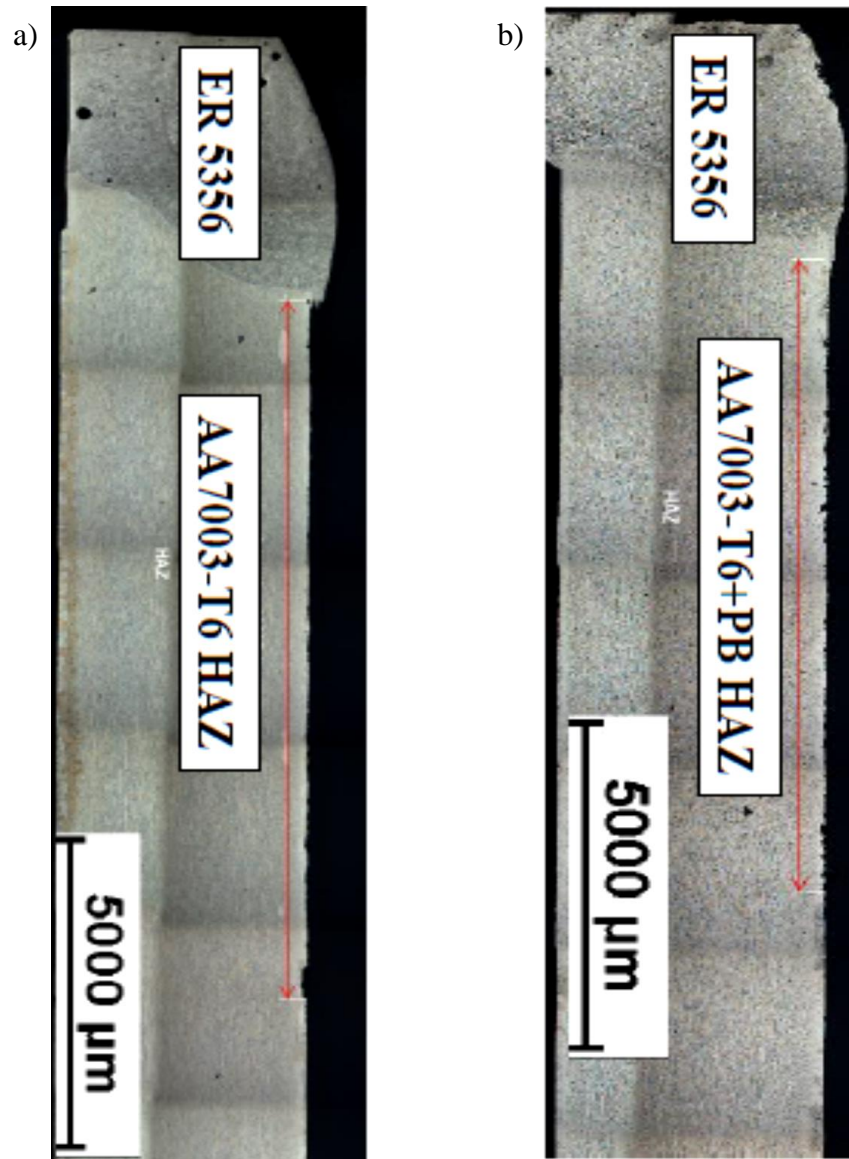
Large area scans of lap-joint welded configuration G (ER5356/AA7003/≡) in the (a) as-welded T6 condition and the (b) as-welded T6+PB condition post exposure to ASTM G85-A2.
